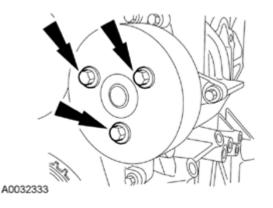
Locating Coolant Pump Pulley Bolts Courtesy of FORD MOTOR CO.
